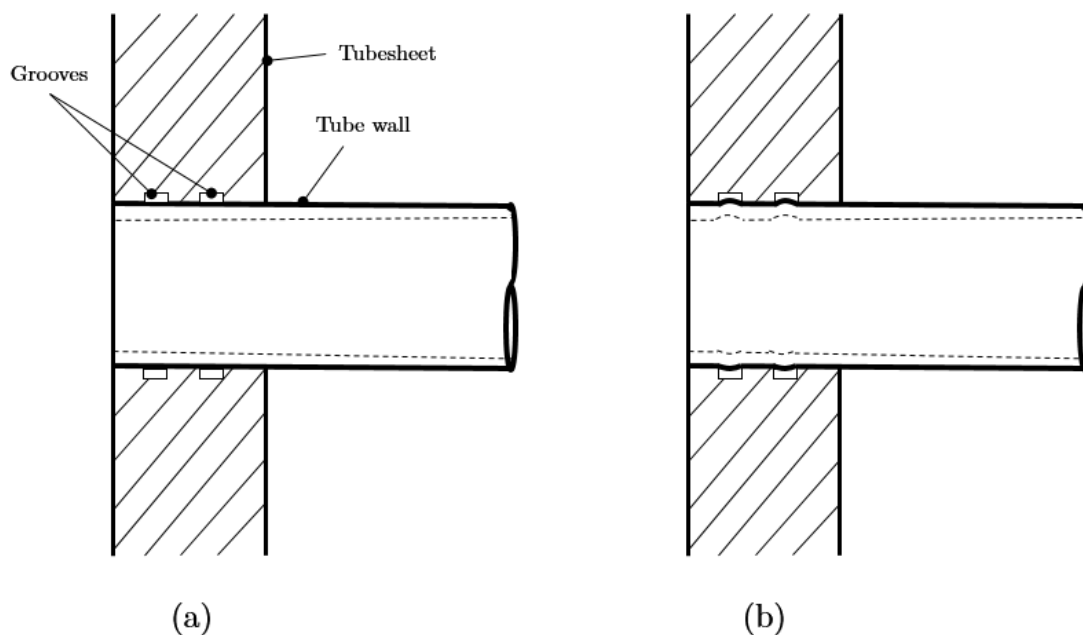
Schematic of a leak-free rolled joint between the tube and tube hole of a tubesheet. (a) before tube expansion. (b) after tube expansion
